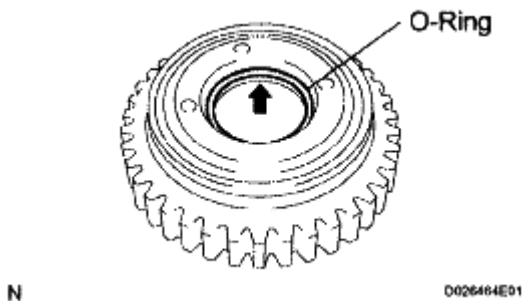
Locating Overdrive Direct Clutch O-Ring
